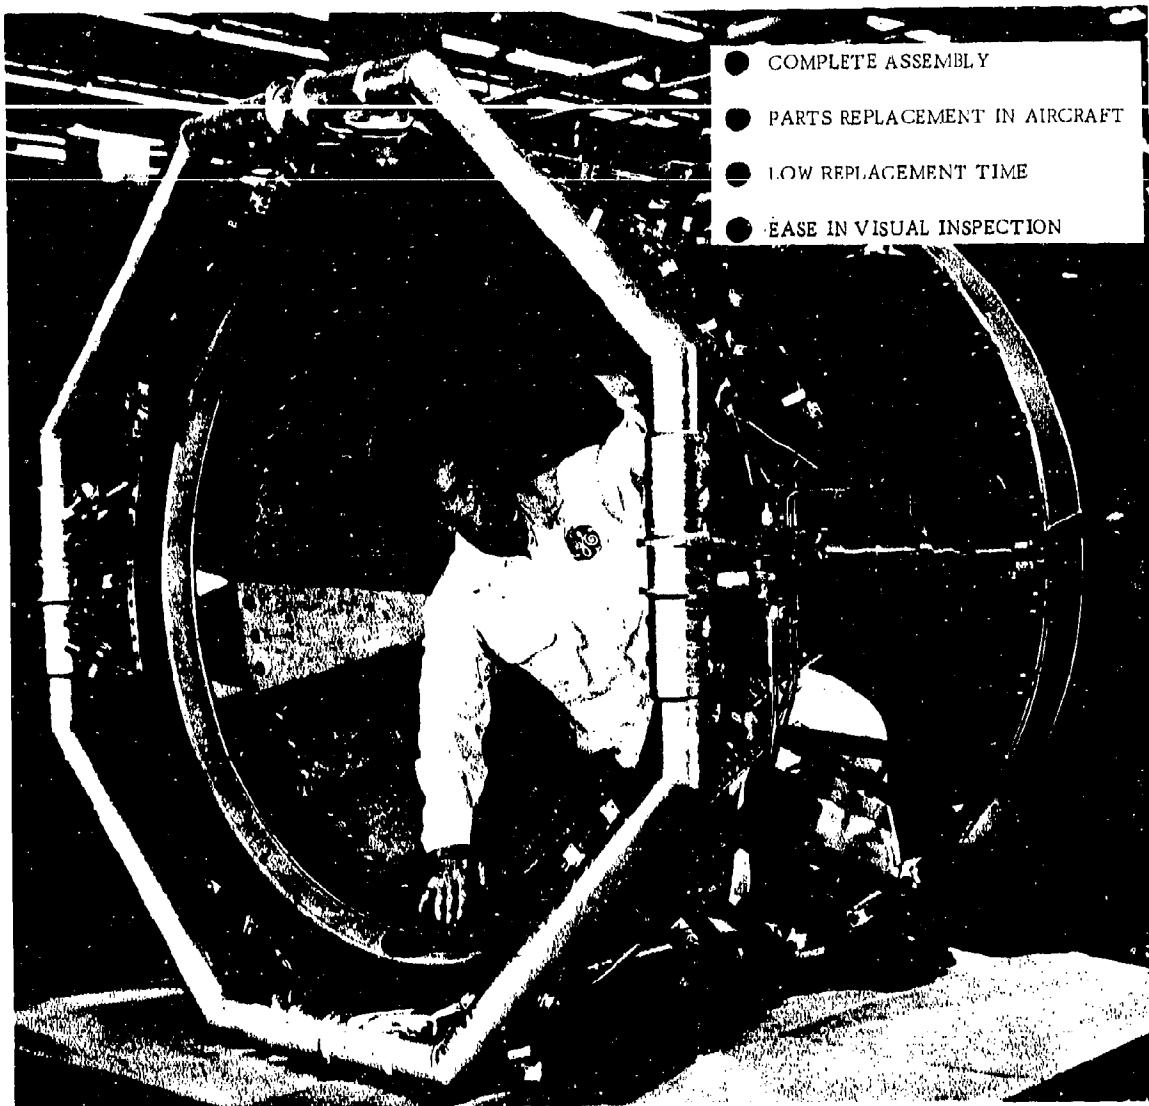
GE4 PRIMARY NOZZLE ASSEMBLY
